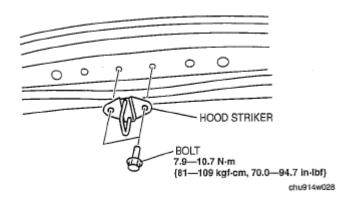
Identifying Hood Striker And Bolt With Torque Specifications Courtesy of MAZDA MOTORS CORP.
